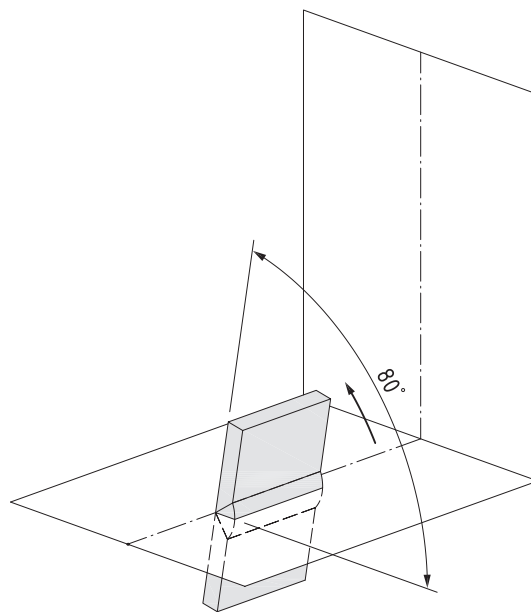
Welding position PC slope and rotation limits for butt welds
